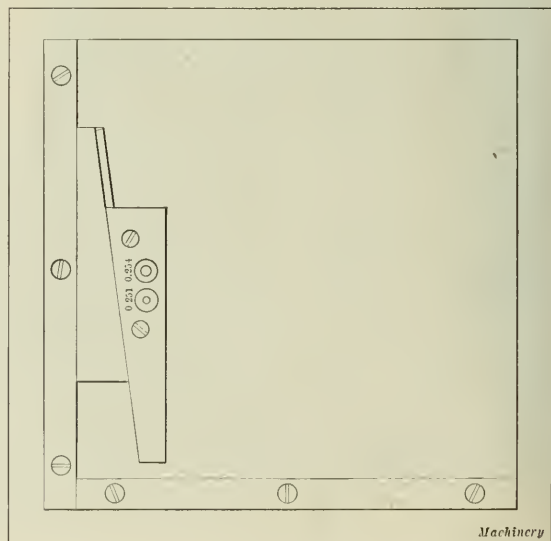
Using Parallels with Surface Plate for locating Holes in Small Work
